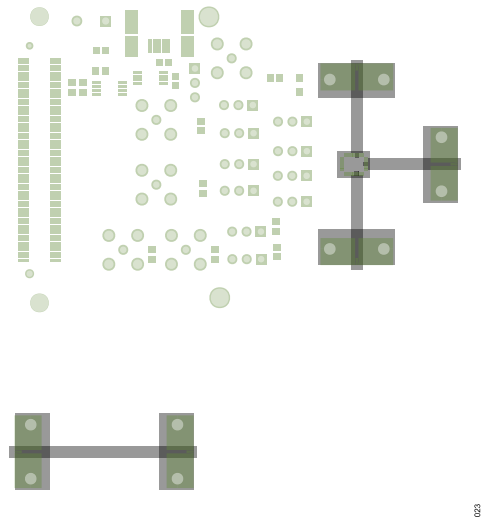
EVAL-ADGM1001SDZ Solder Mask Top
